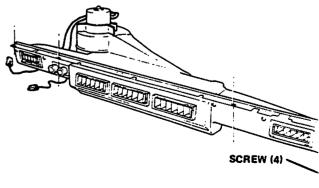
E-4 Evaporator Housing Mountipg—CJ and Scrambie
